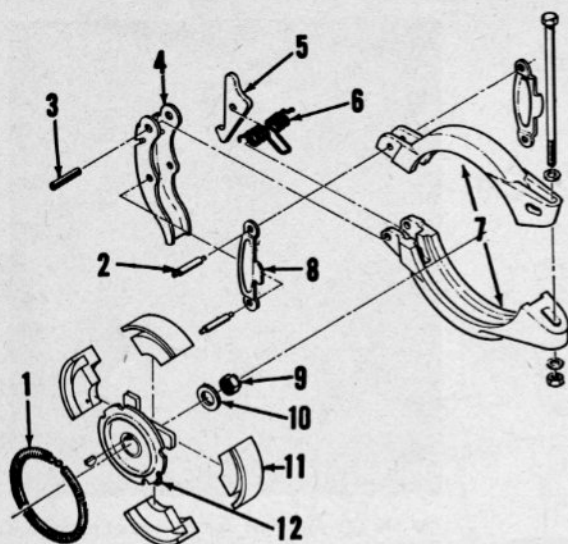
Exploded view of clutch assembly and transmission retaining clamp assembly.
